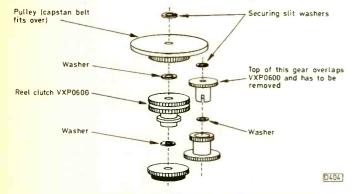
The reel drive arrangement, viewed from the rear with the machine upside down.
